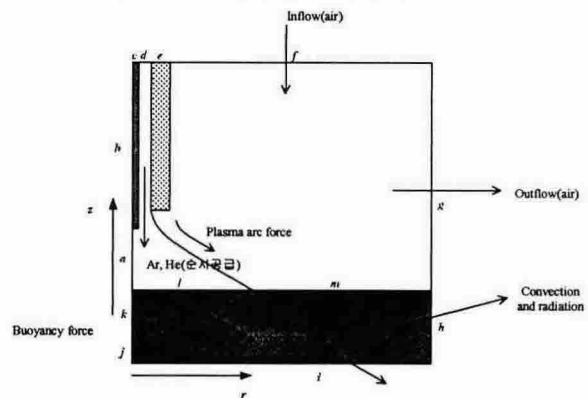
Schematic diagram of GMA welding process using alternate supply of shielding gas
